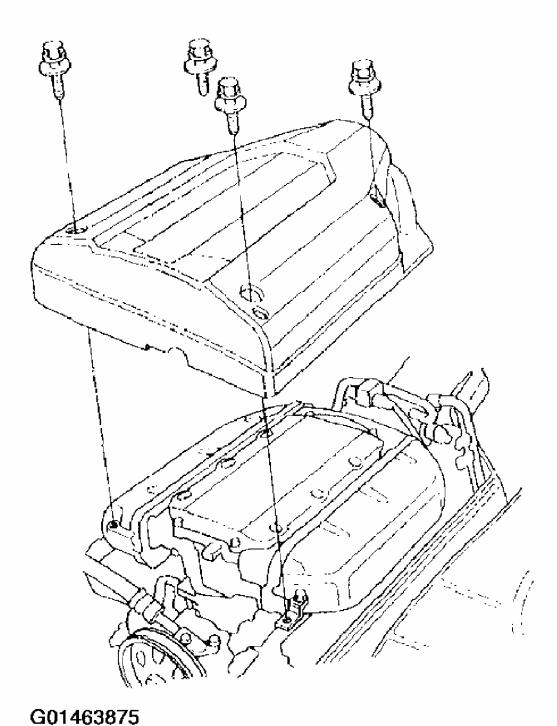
Exploded View Of Intake Manifold Courtesy of AMERICAN HONDA MOTOR CO., INC.
